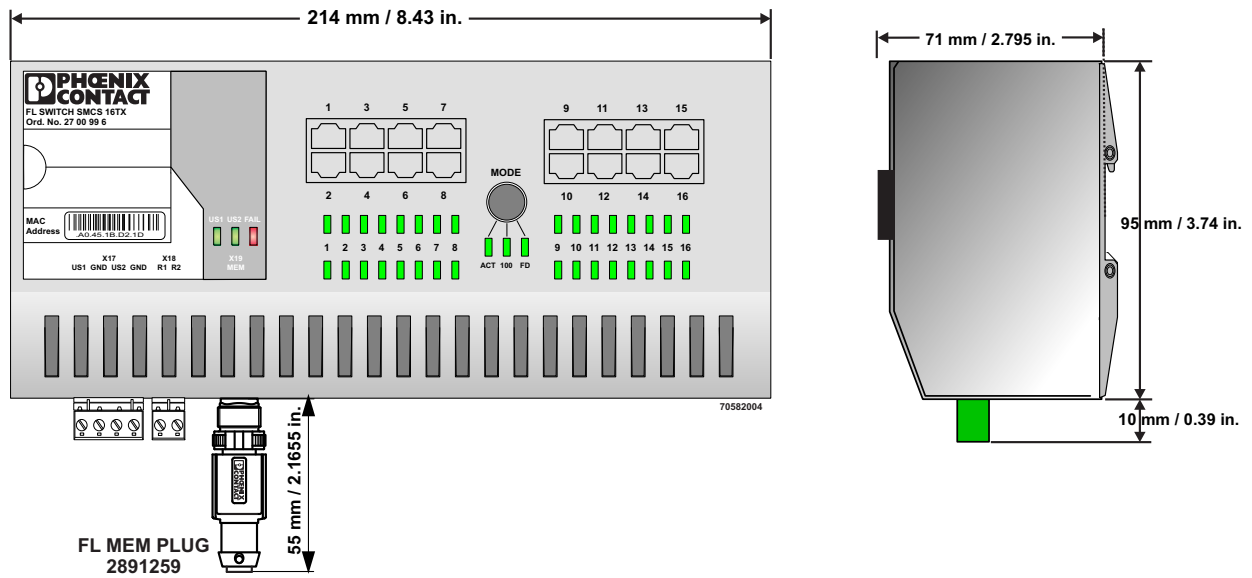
Housing dimensions of the SMCS (16-port version) in millimeters/inches
